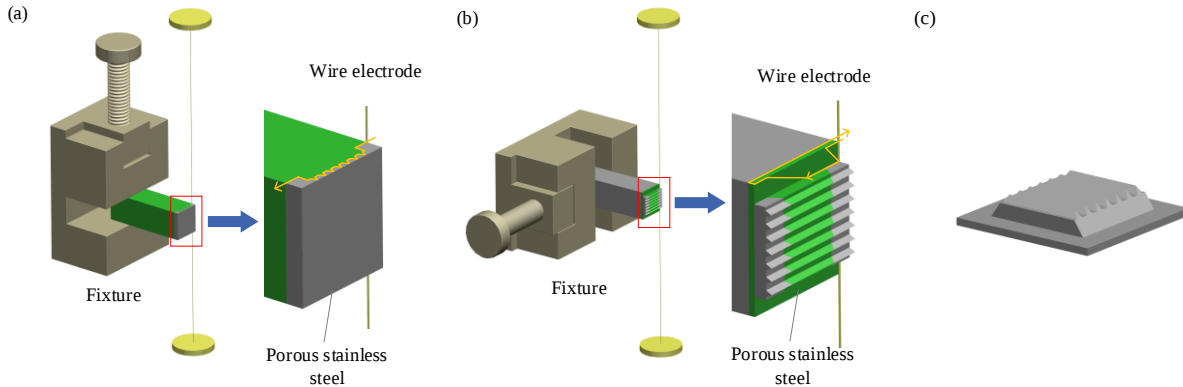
WEDM process of the emitter array: (a) cutting vertically, (b) chamfering and (c) machined emitter array.
